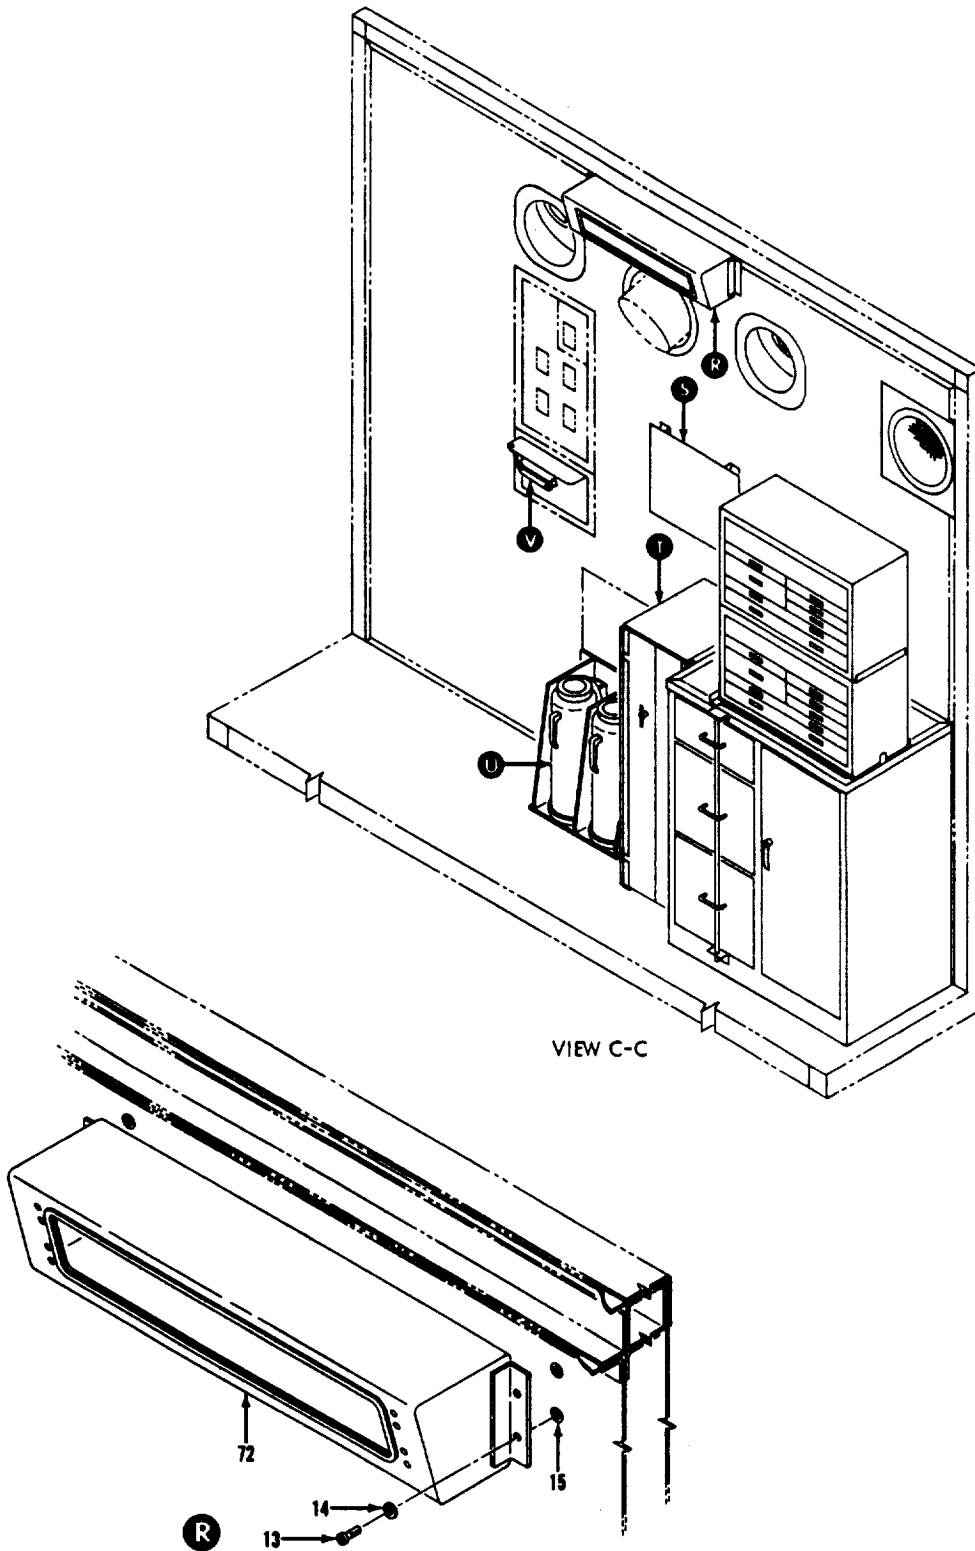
Equipment Installation (Sheet 7 of 25)
